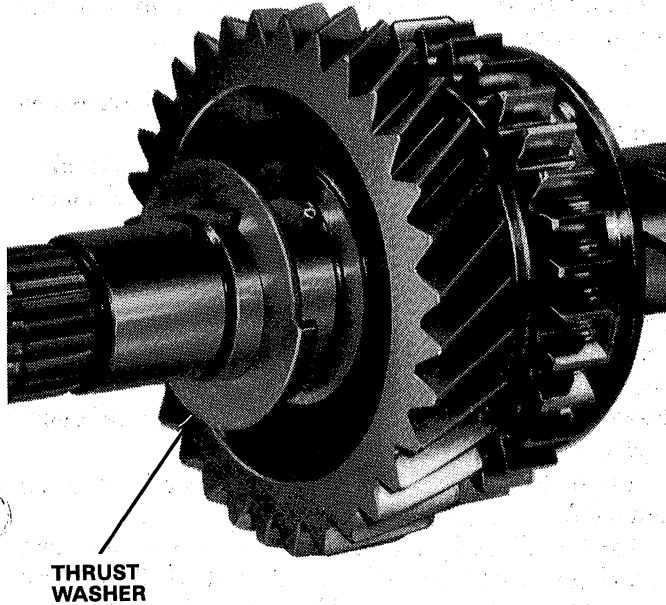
B-25 First Gear Thrust Washer Removal/Installation
